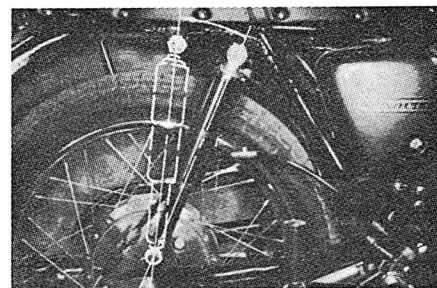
The rear suspension units can be adjusted by relocating top mounting. Front location is normal, rear position is firm.
